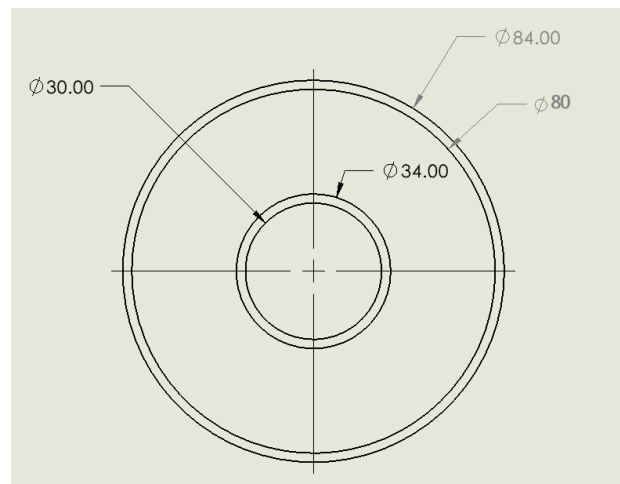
Cross-sectional view of double pipe heat exchanger
